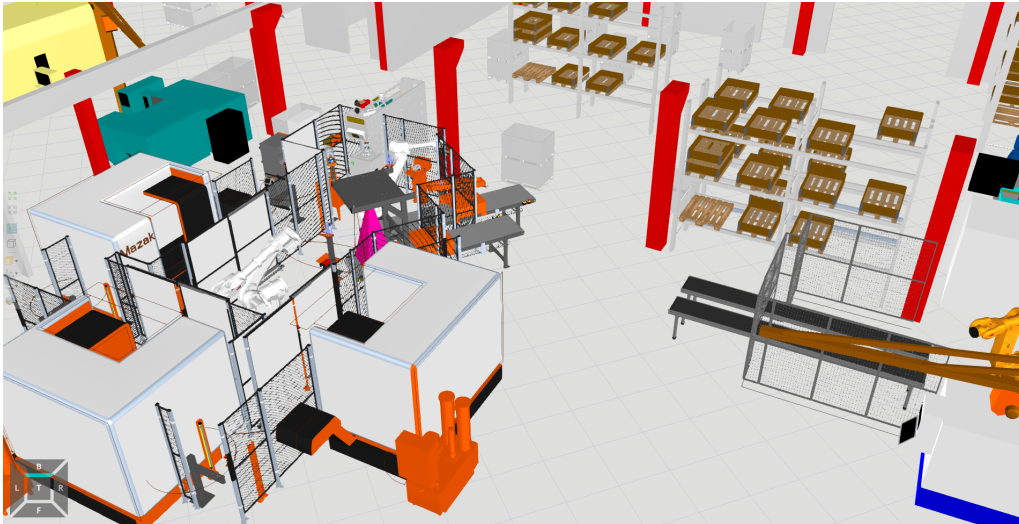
Example of enclosed machine cell with robot, accompanied by nearby pallets, shelves and conveyor belts
